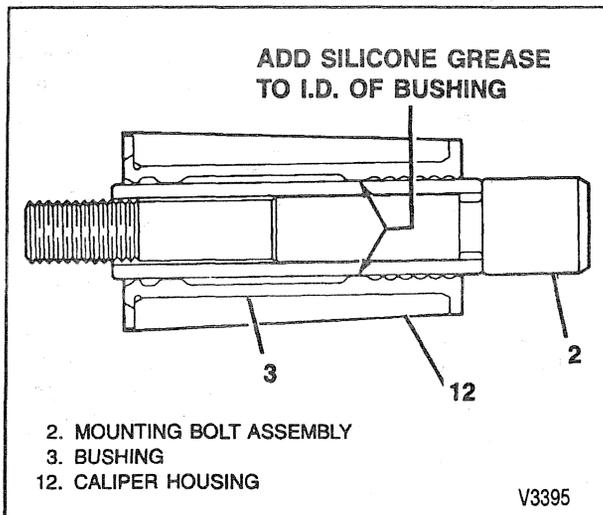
Mounting Bolt Lubrication (Delco 3486)
